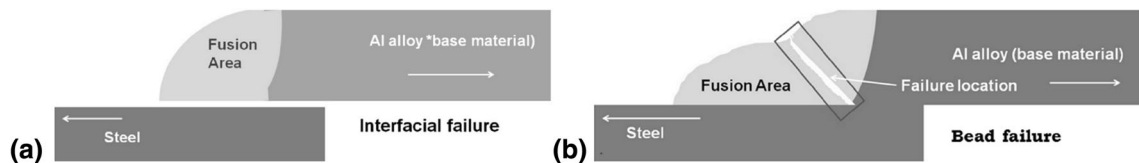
Failure location in weld-brazed aluminium–steel joint: a interfacial failure, b braze bead failure
